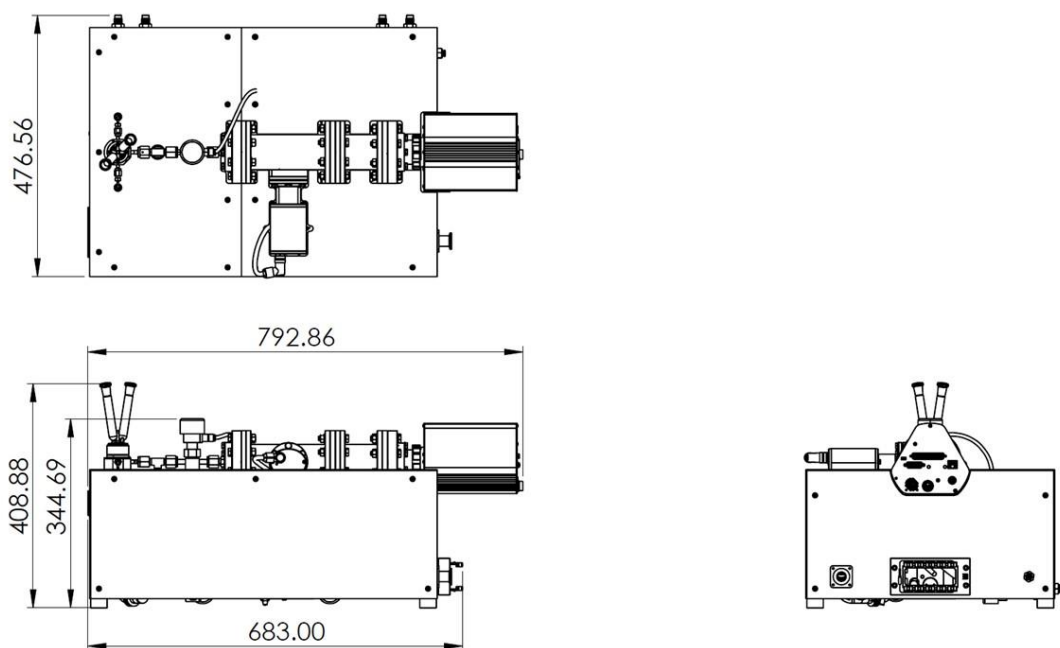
Dimensional drawing with physical occupancy. Dimensions are shown in mm.
